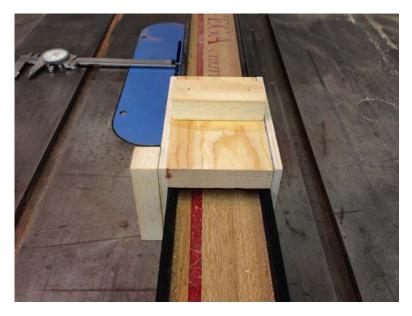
Another view of the table saw fence fixture. The fixture was made with scrap pine lumber and $\frac{1}{4}$ " plywood. The top block is the pushing handle.
